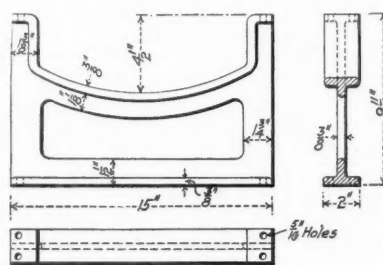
Details of Cast-Iron Base for Tool Rack.
